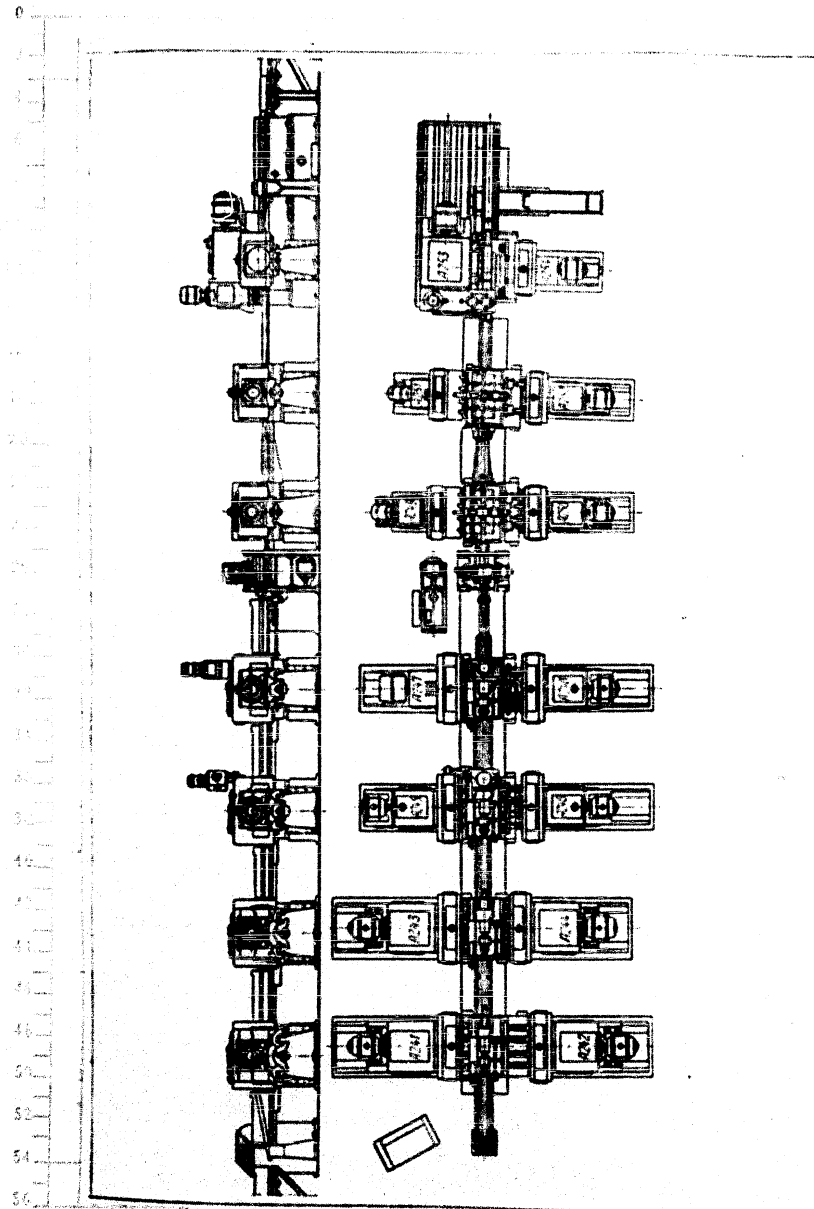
Automatic Line for Treatment of Heads of Cylinder Blocks of Tractor Engines
